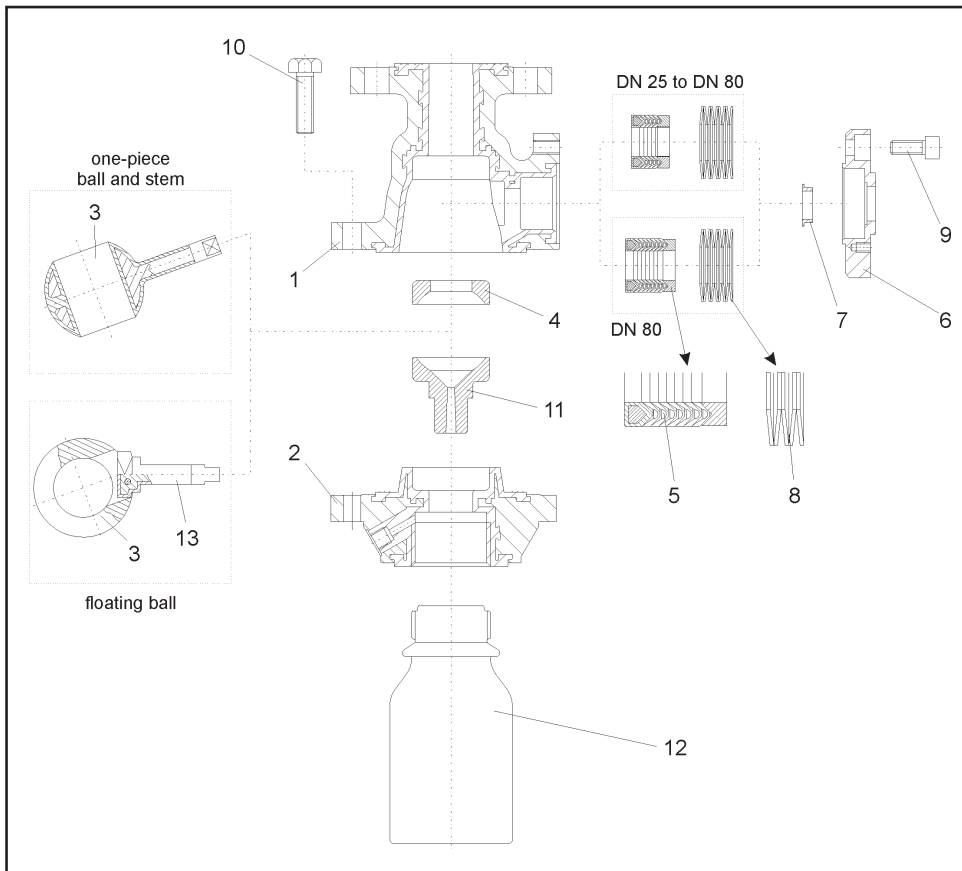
Explosion drawing of the sampling valve Series 27m
